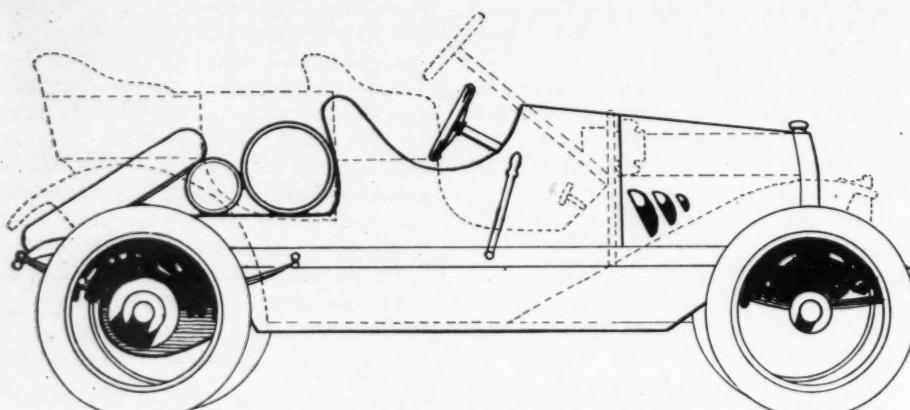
Suggested body design for use on old Carter car. The seat cannot be real low because of the necessary clearance over the friction disks
